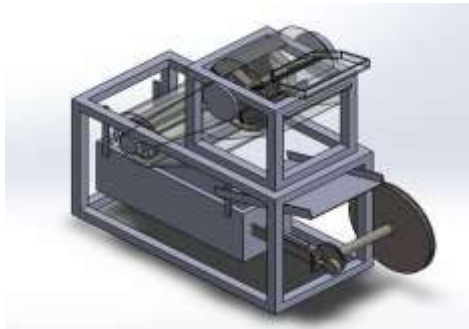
The CAD model of the groundnut shelling machine showing 3D view
